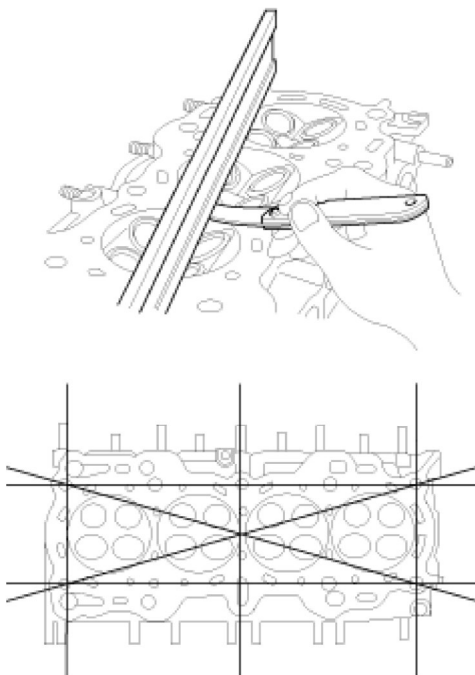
Checking Flatness Of Cylinder Head Gasket Surface
